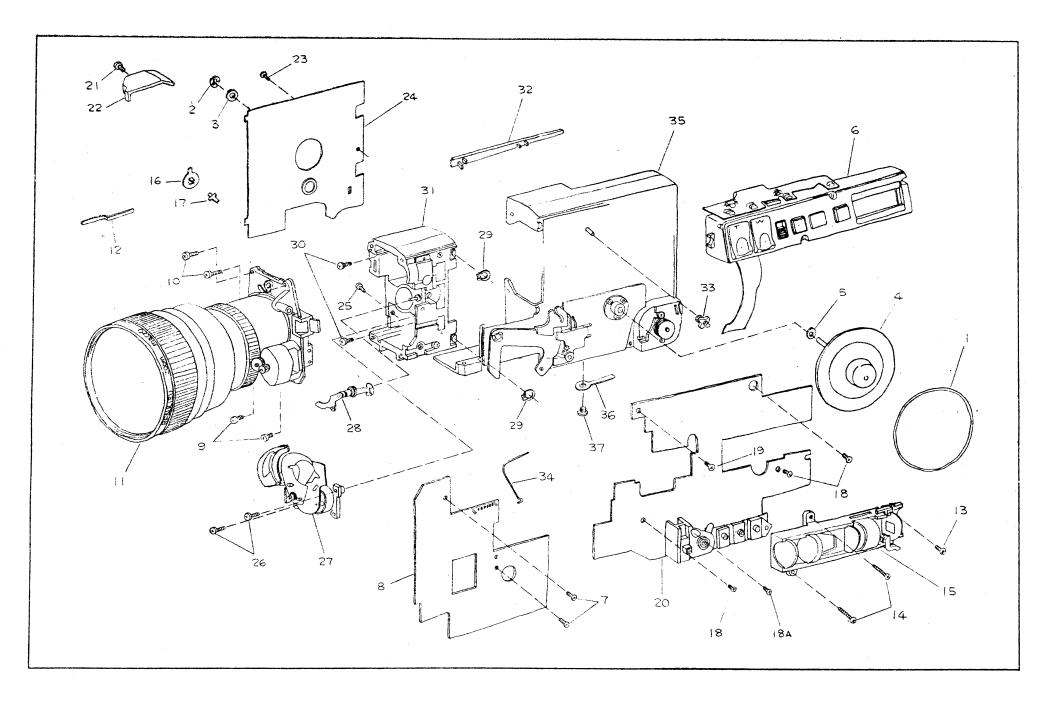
Camera Body Assembly (2) - CAMERA COMPLETE-1008 XL
